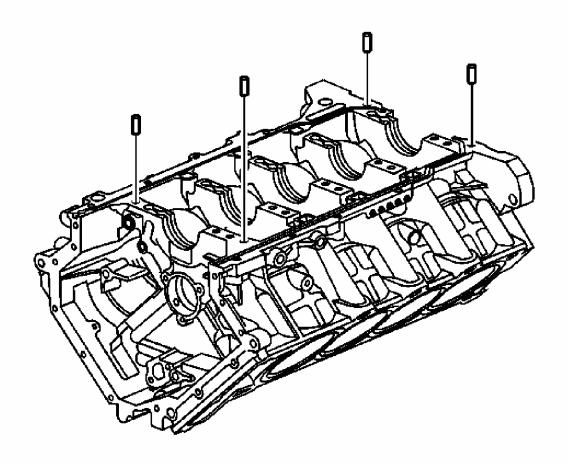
Identifying Lower Crankcase Locating Dowel Pins Courtesy of GENERAL MOTORS CORP.
